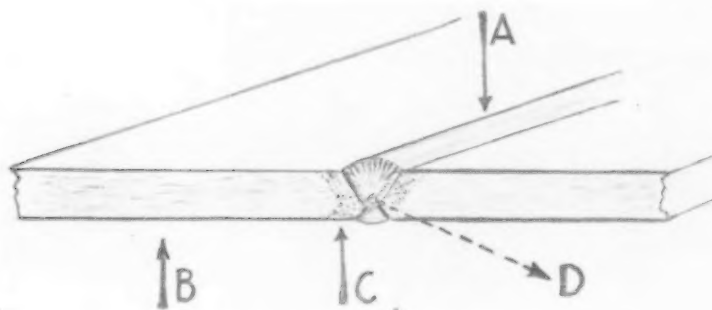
Diagram (left) representing the various metallographic conditions which can be produced by welding two pieces of 12 to 14 per cent low-carbon chromium material with welding rod of similar analysis.
